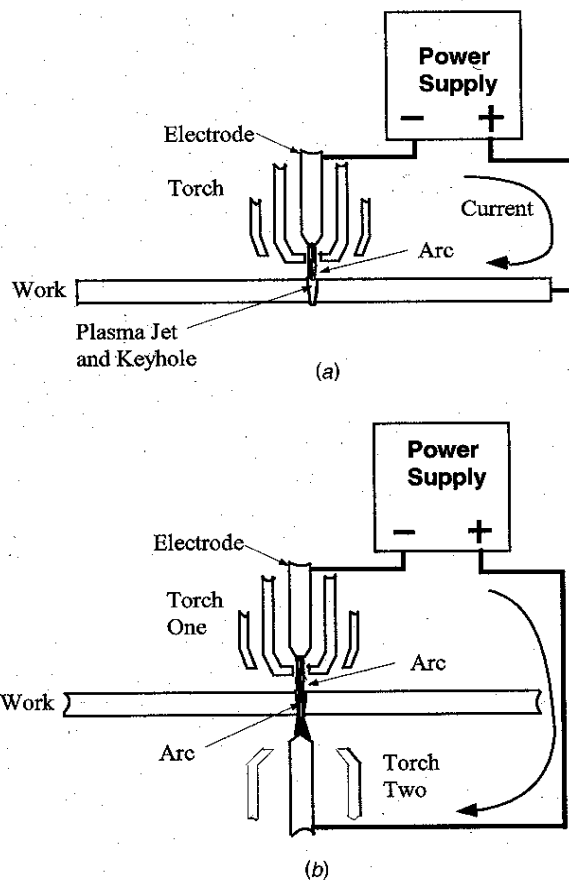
Schematic diagrams of welding systems: (a) regular welding system (b) double-sided arc welding system
